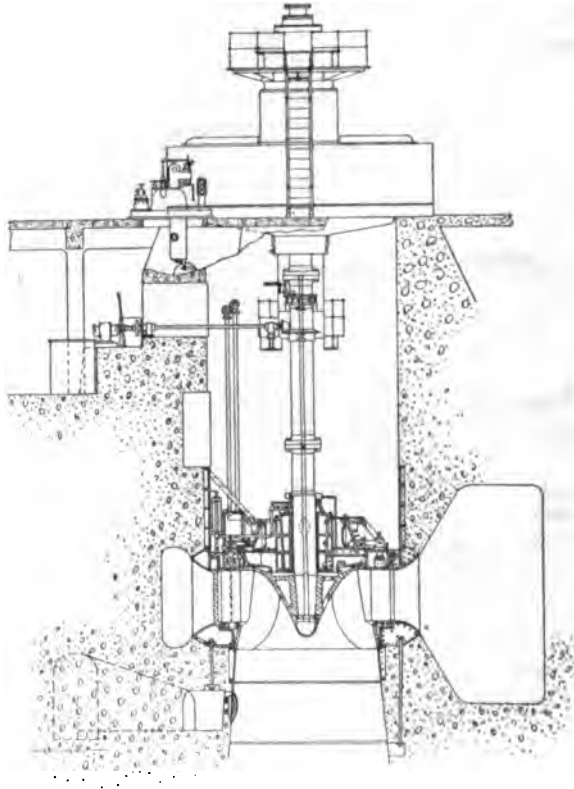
SHOWING OIL PUMP GEAR-DRIVEN FROM MAIN TURBINE SHAFT
